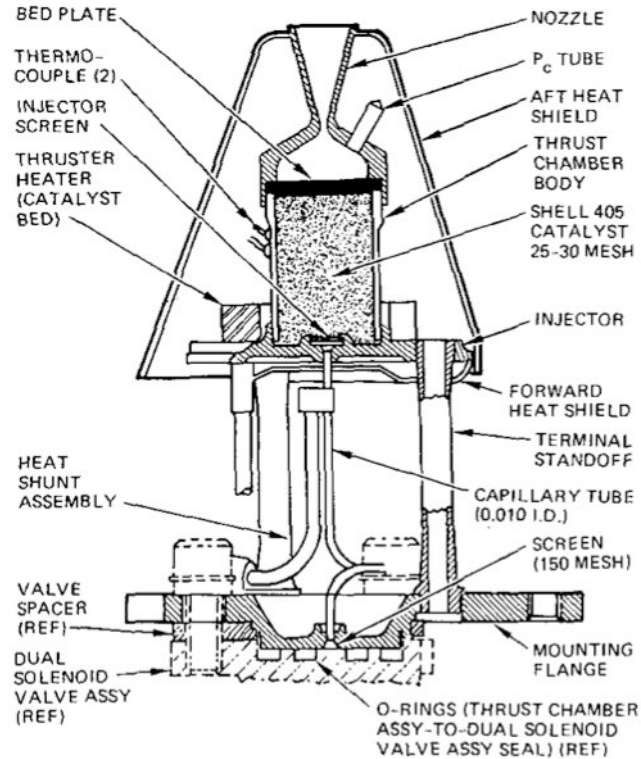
0.2-lbf Thruster Thrust Chamber Assembly
